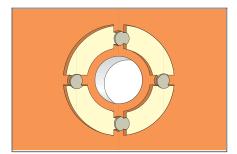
Mill adjacent to the plated hole to sever spoke connections.
